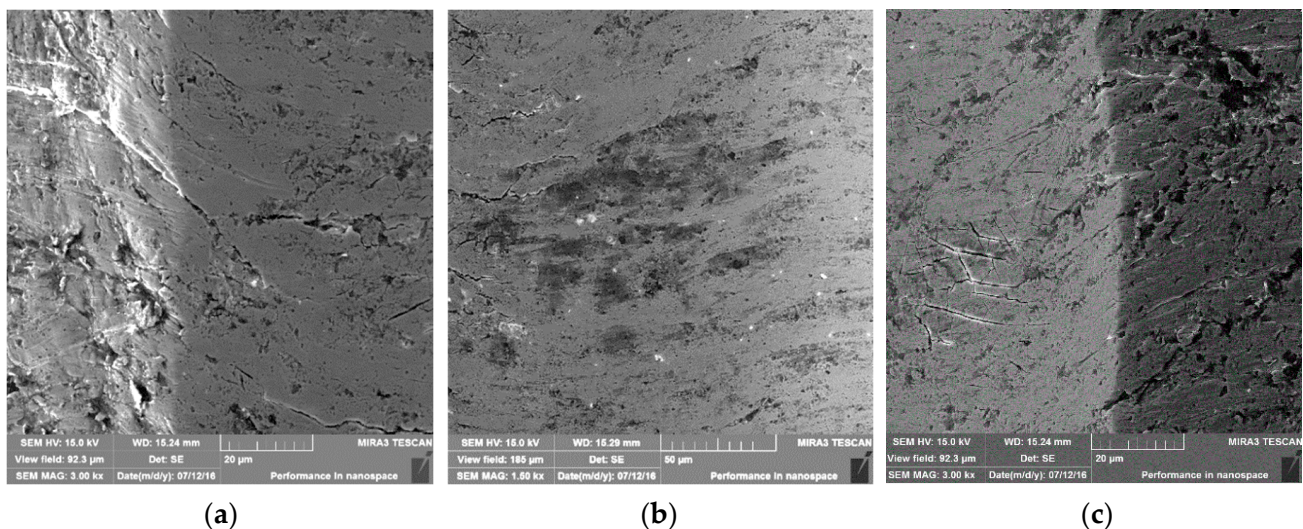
Weld deposit C after the scratch test: (a) scratch, (b) position along with the scratch, and (c) scratch profile.
